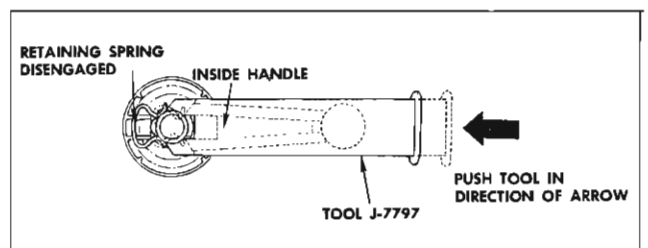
Disengaging Inside Handle Retaining Spring
